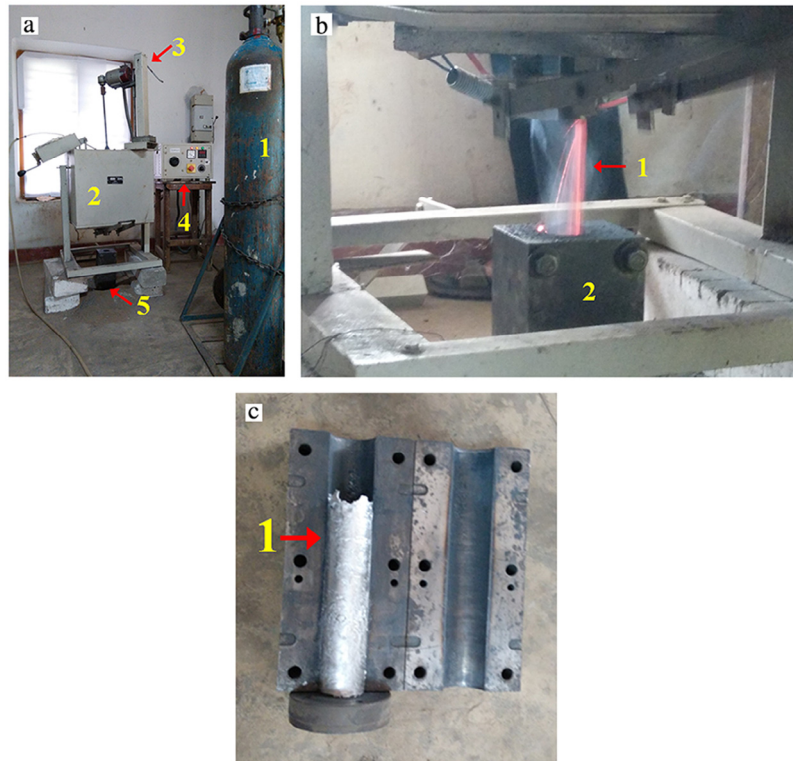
Macrographs of (a) Stir casting equipment (1. Argon gas cylinder, 2. Electric furnace, 3. Stirrer, 4. Control unit and 5. Mild steel mold), (b) Flow of the composite melt (1. Melt and 2. Mild steel mold) and (c) Dismantled mild steel mold (1. Cast specimen).
